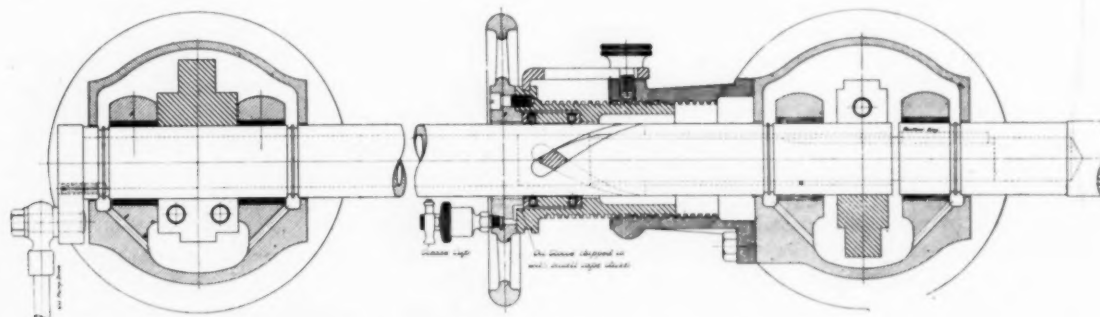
VALVE GEAR FOR AUXILIARY EXHAUST VALVES
